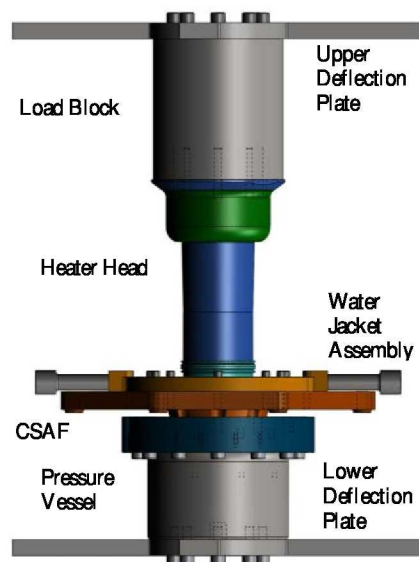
Heater Head Lateral Load Test Article. 3-D model of the primary assembly components.
